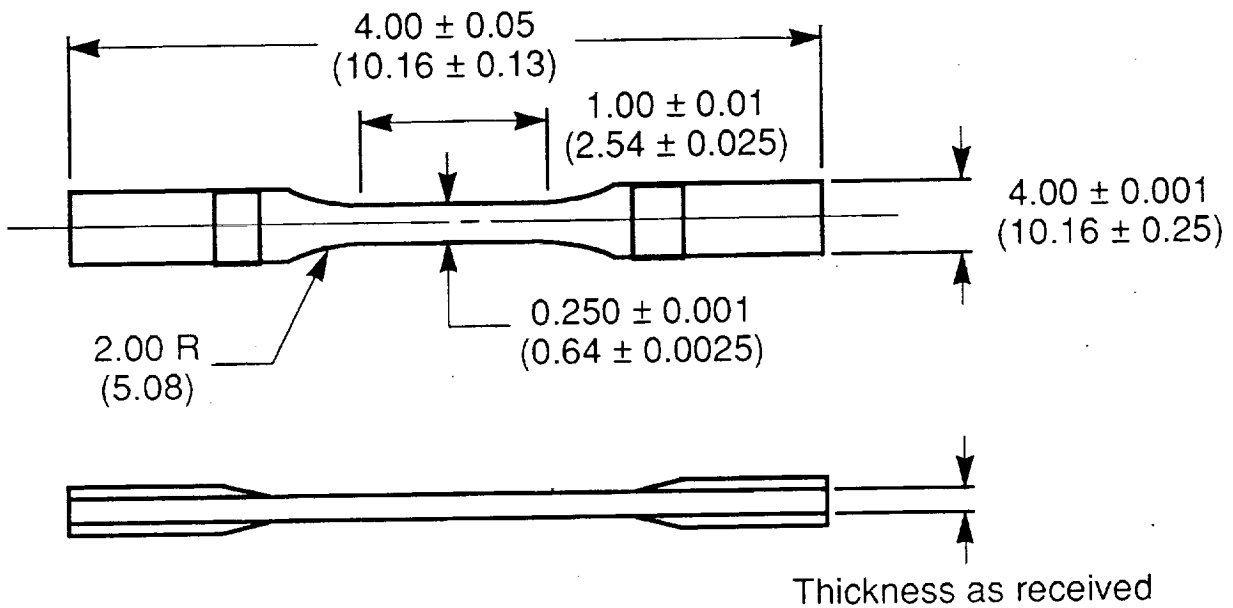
Tensile Specimen Configuration. Dimensions in Inches (cm).
